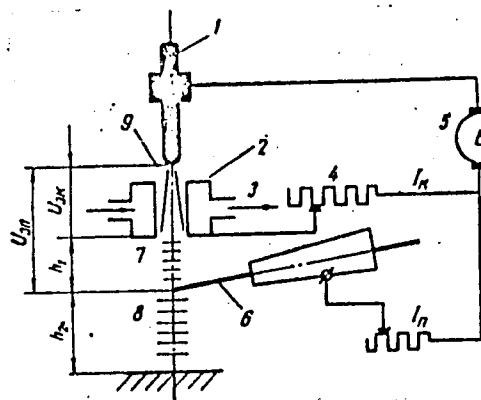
Plasma-arc metal deposition with current-carrying filler wire
